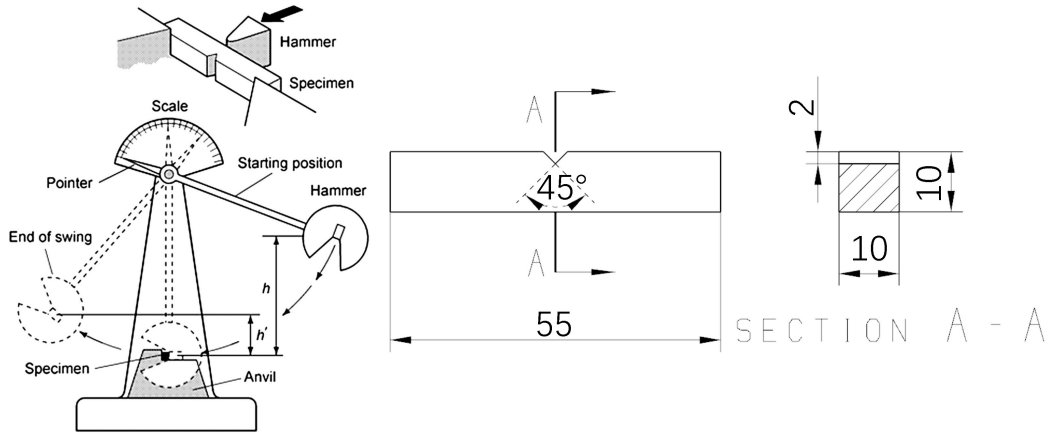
The schematic of Charpy impact test [122] and the standard dimensions of specimens after machining.
